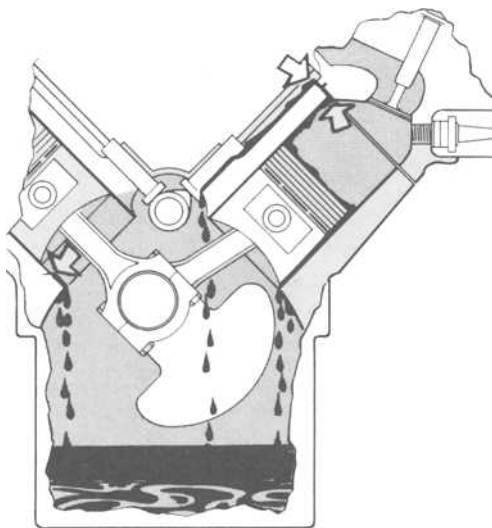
Leakage of coolant into the engine can occur through a loose cylinder head joint or cracks in the cylinder block or head. Either water or antifreeze coolant mixed with engine oil in sufficient quantities may cause lubrication failure and serious engine damage.
